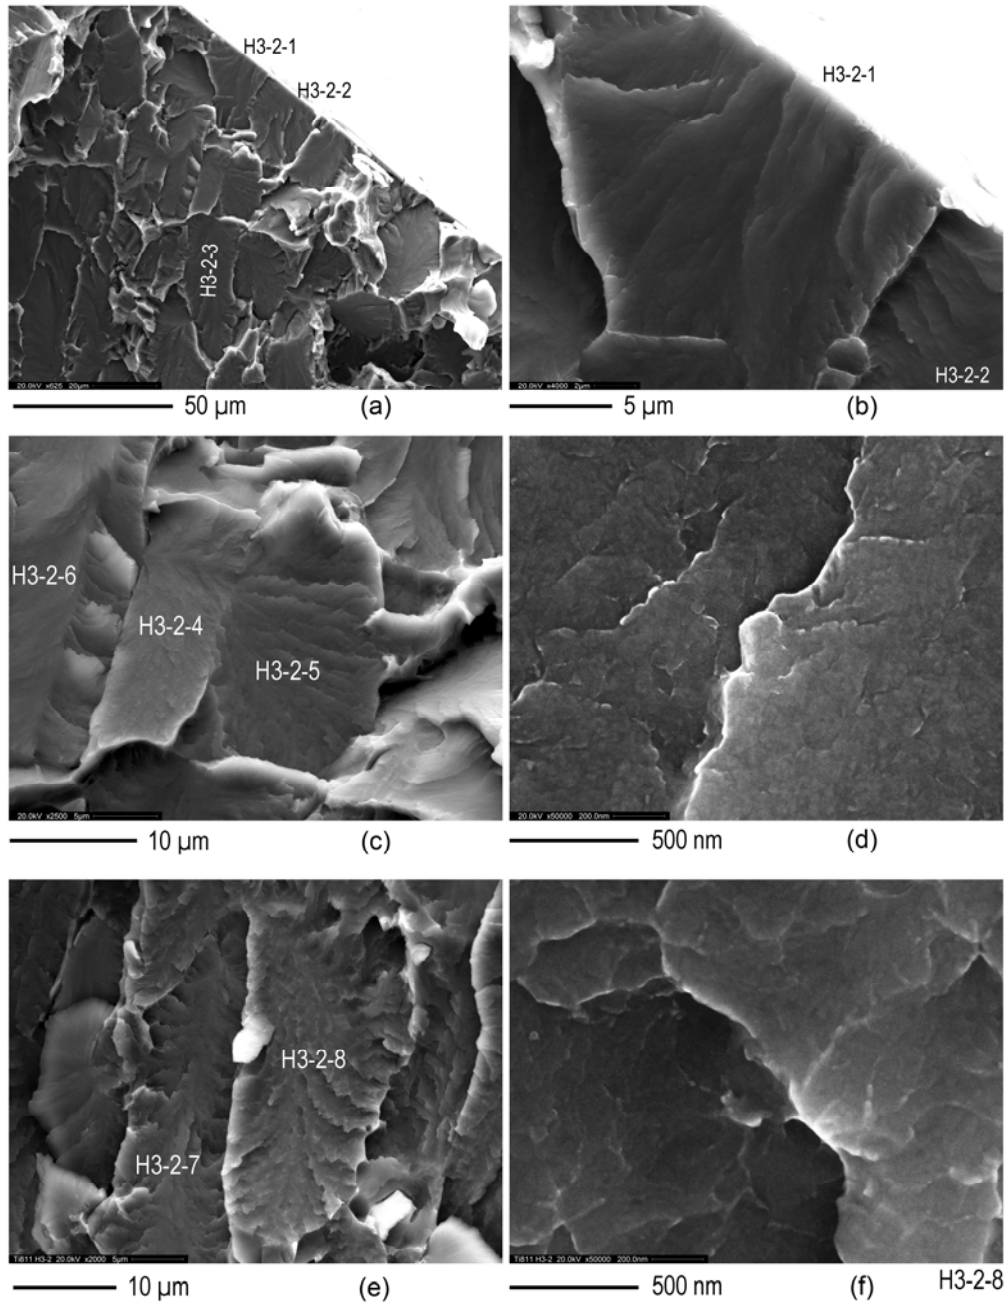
Fractography of the aged specimen. Facets H3-2-7 and H3-2-8 in (e) and (f) were observed at a crack length of ~1 mm.
